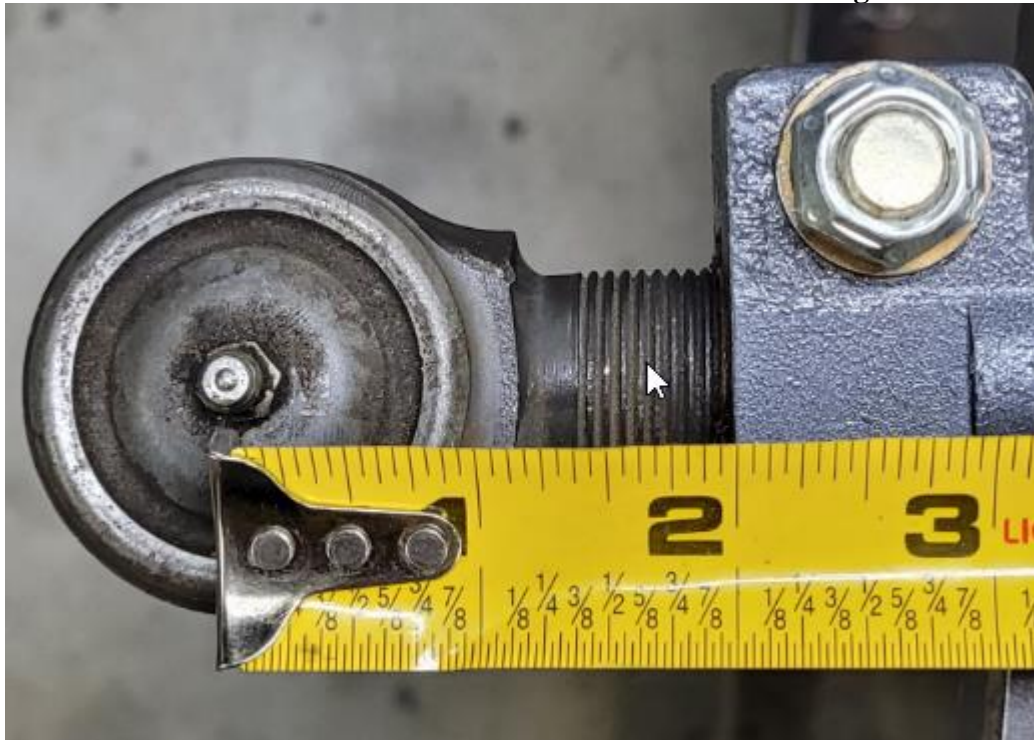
Non-Double Adjuster End of Drag Link at Steering Knuckle
